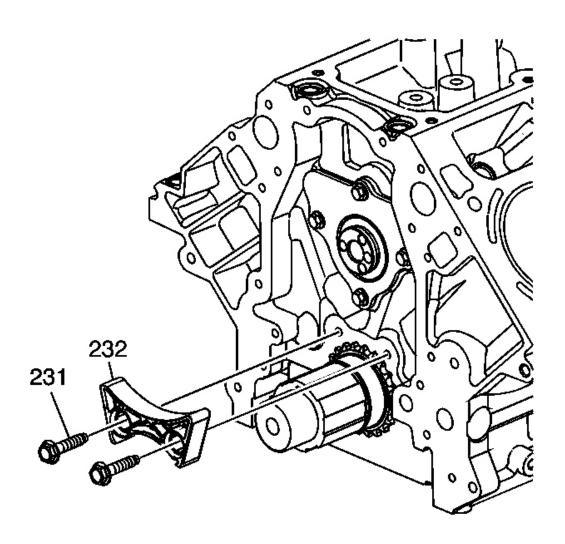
Timing Chain Dampener & Bolts Courtesy of GENERAL MOTORS CORP.
